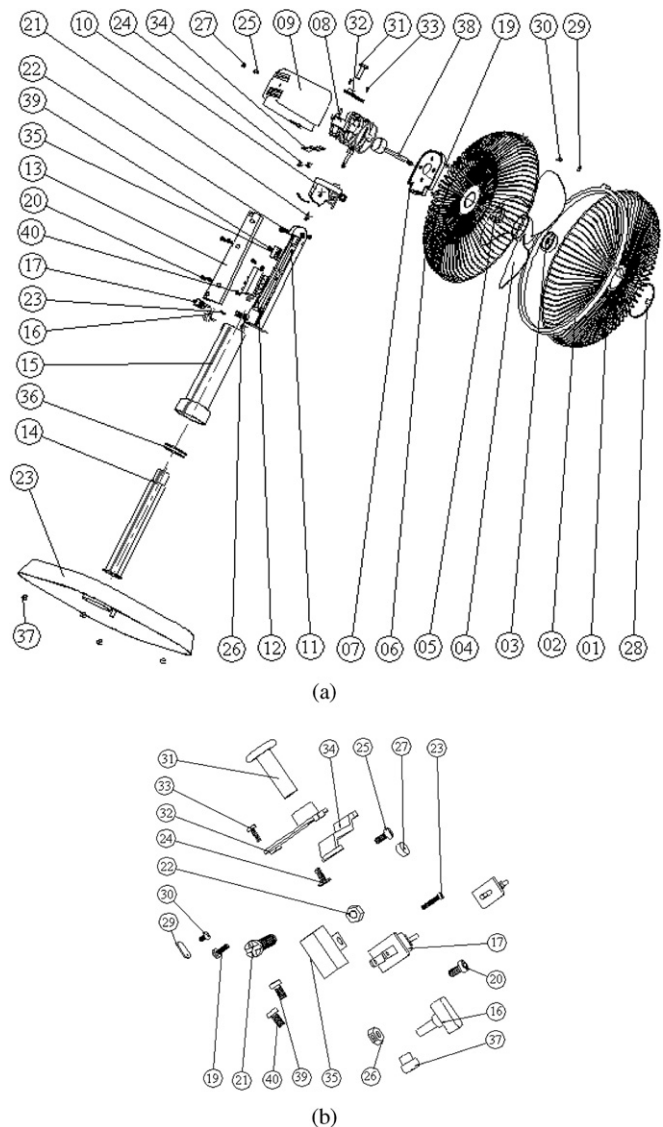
Illustration of electric-fan: (a) exploded drawing and (b) enlarged scale drawing for small parts in (a).
